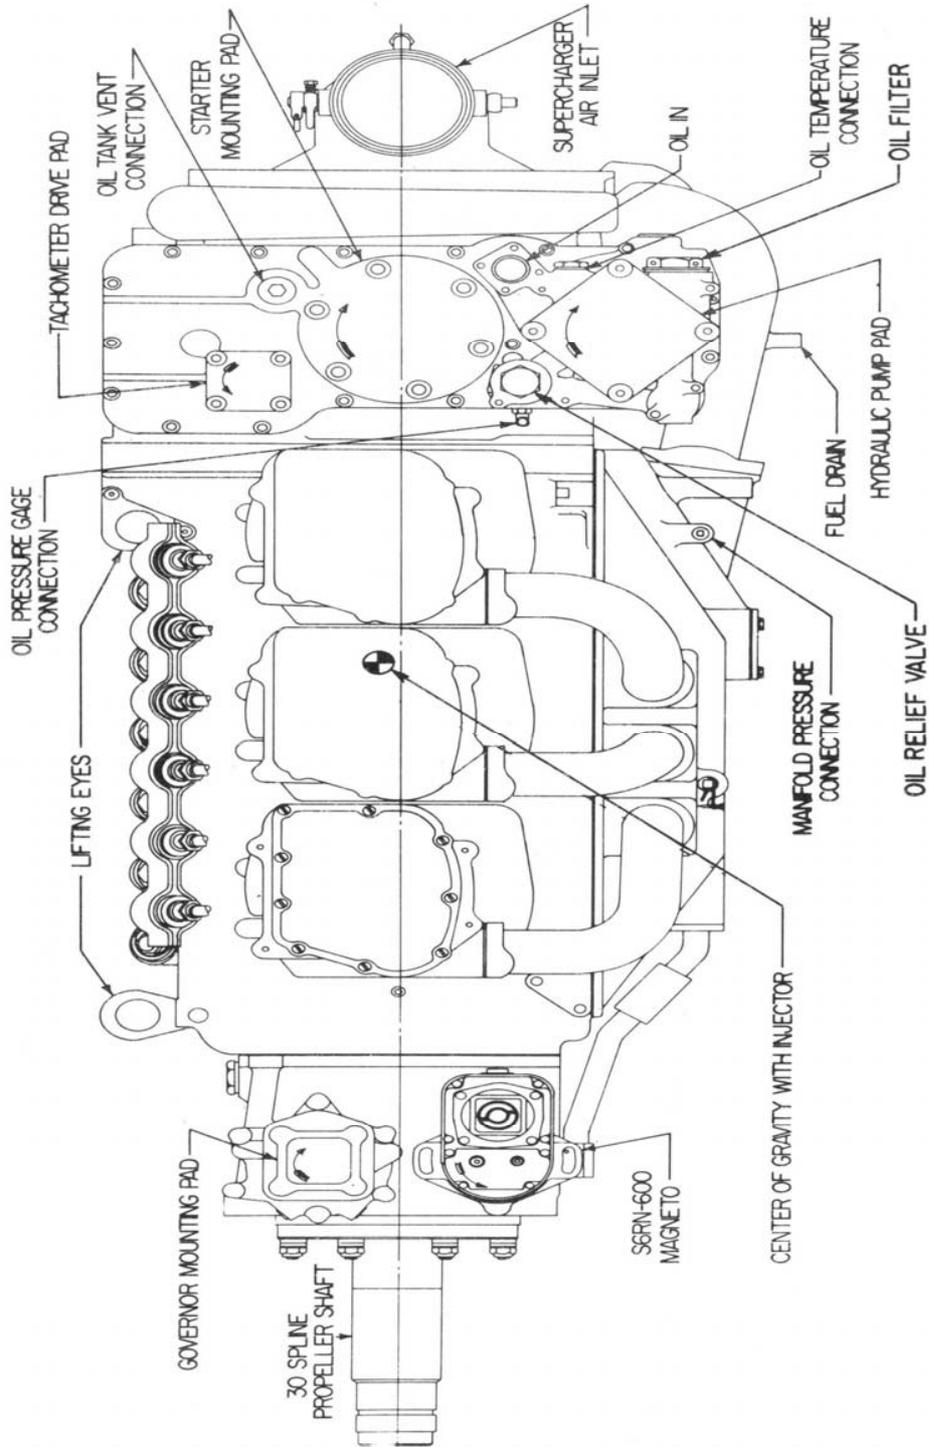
Installation Drawing – Typical IGSO-540-B Series –
